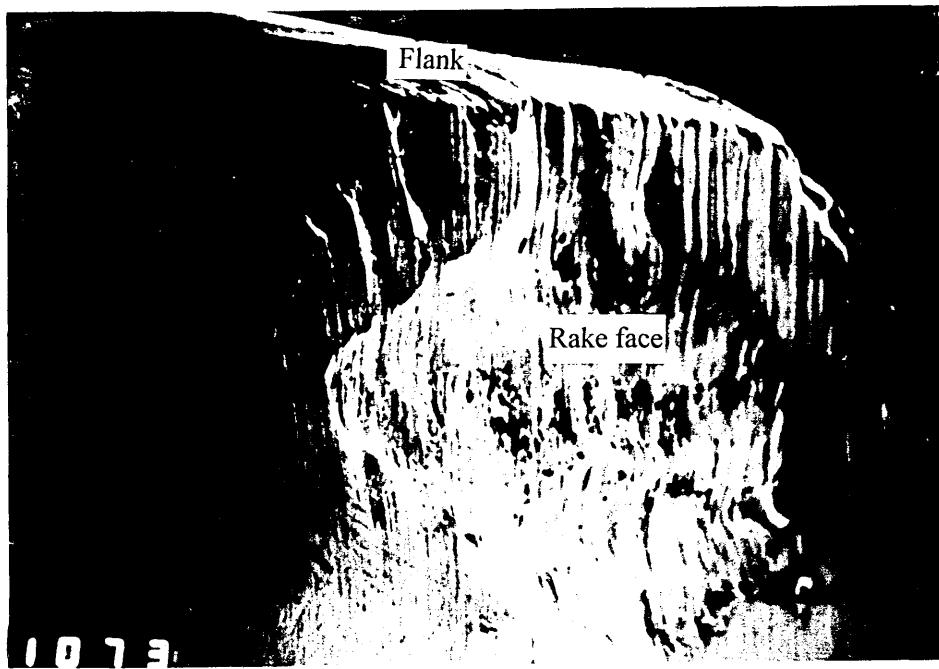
(a) The crater wear and edge chipping produced on the rake face of roughing tooth when sawing mild steel with segment type A2
